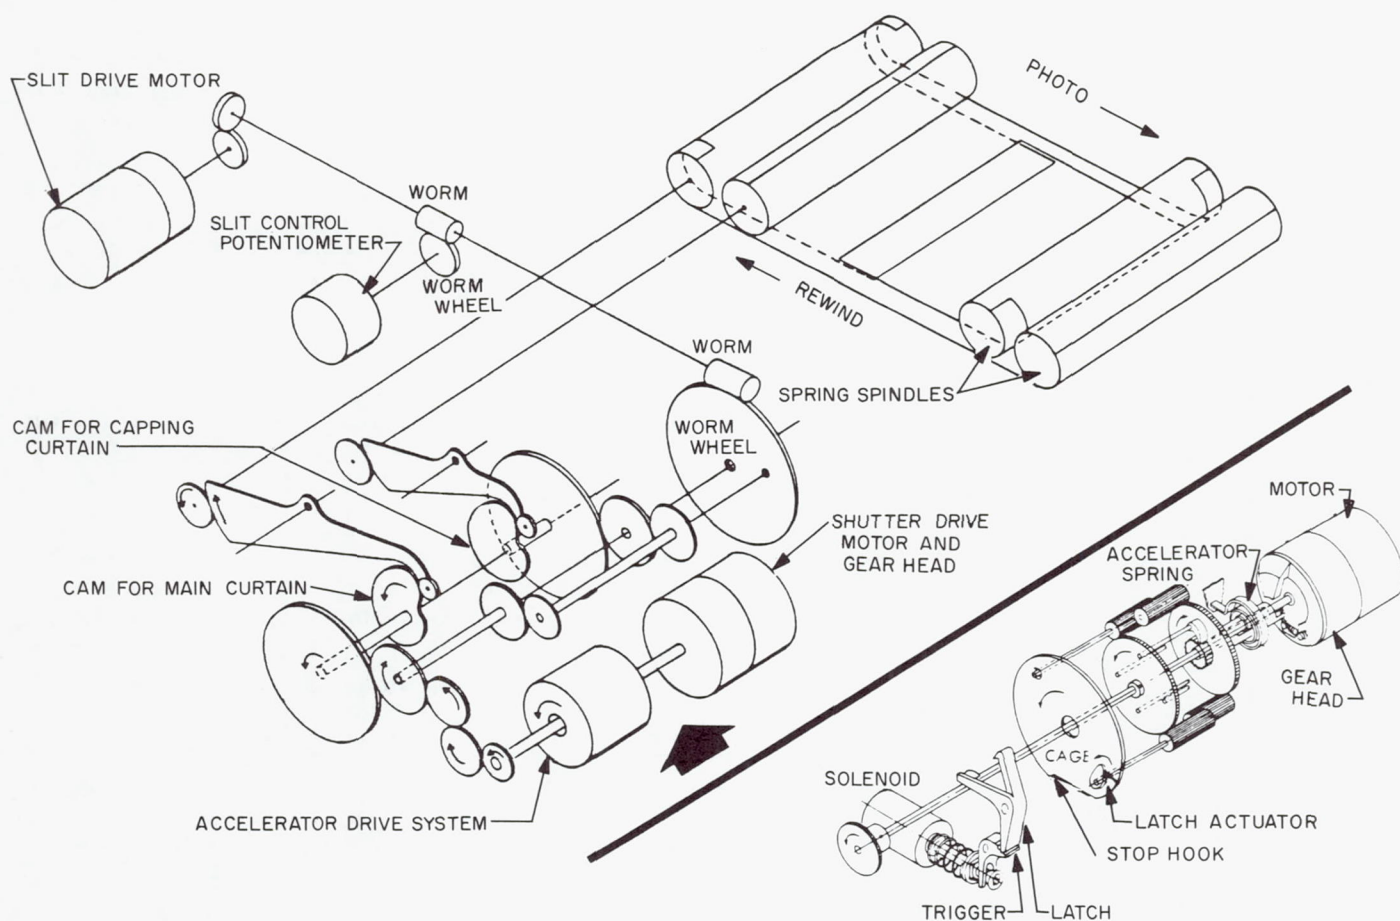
Mechanical schematic drawing of the focal-plane shutter
